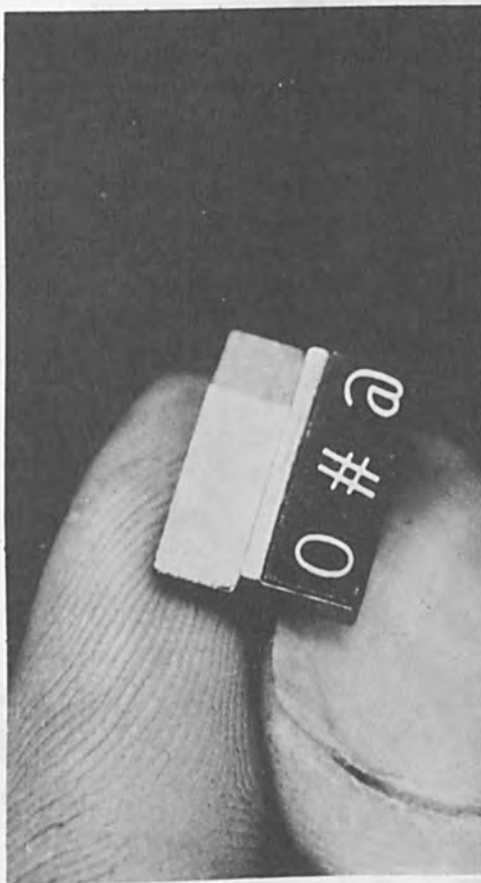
Carbide type face EB-welded to heat-treated sintered metal type carrier.
